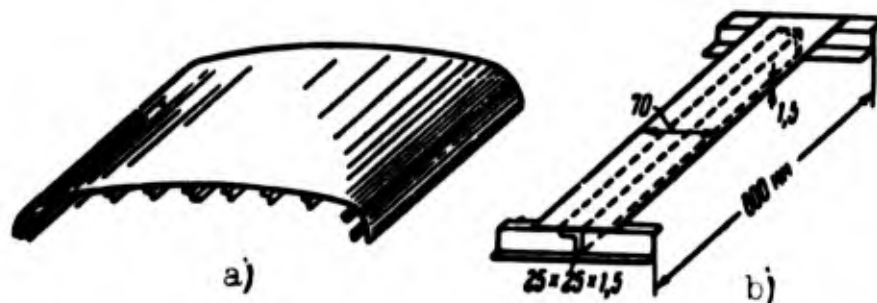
Calculation of stability of roof of all-metal railroad car.
